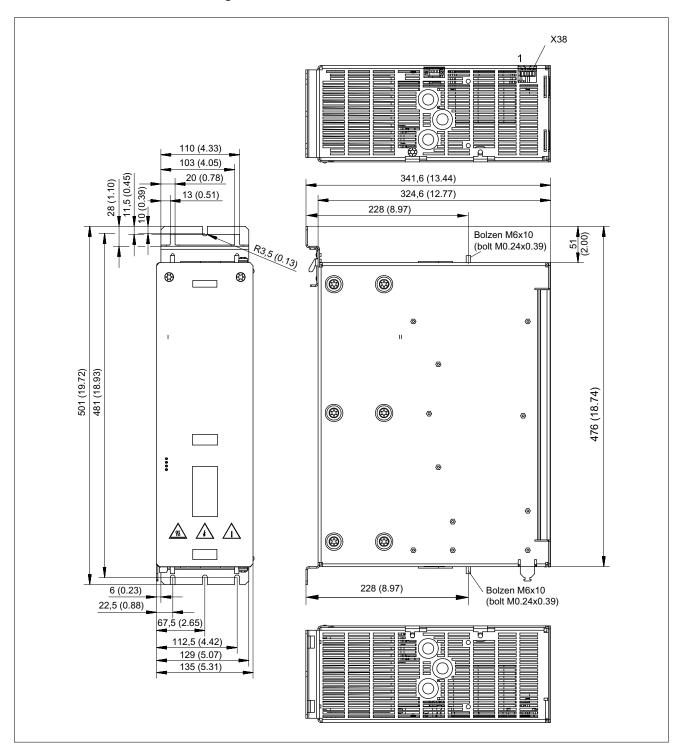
Dimension drawing of 100 kW and 170 kW MASTERDRIVES braking unit, all dimensions in mm and (inches)
